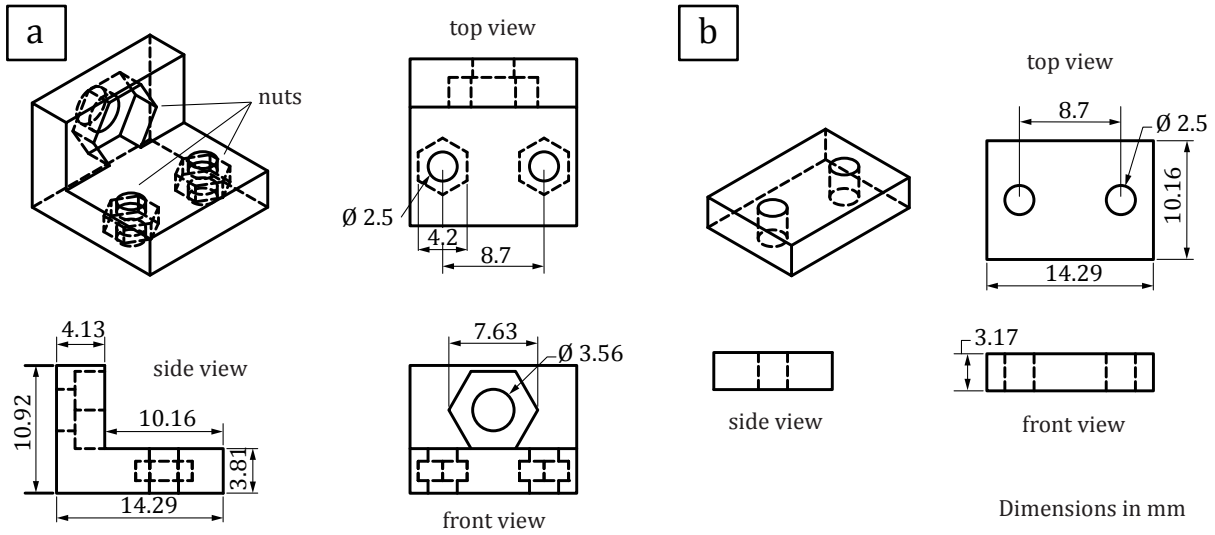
Design of (a) bottom and (b) top portion of the 3D printed clamps.
